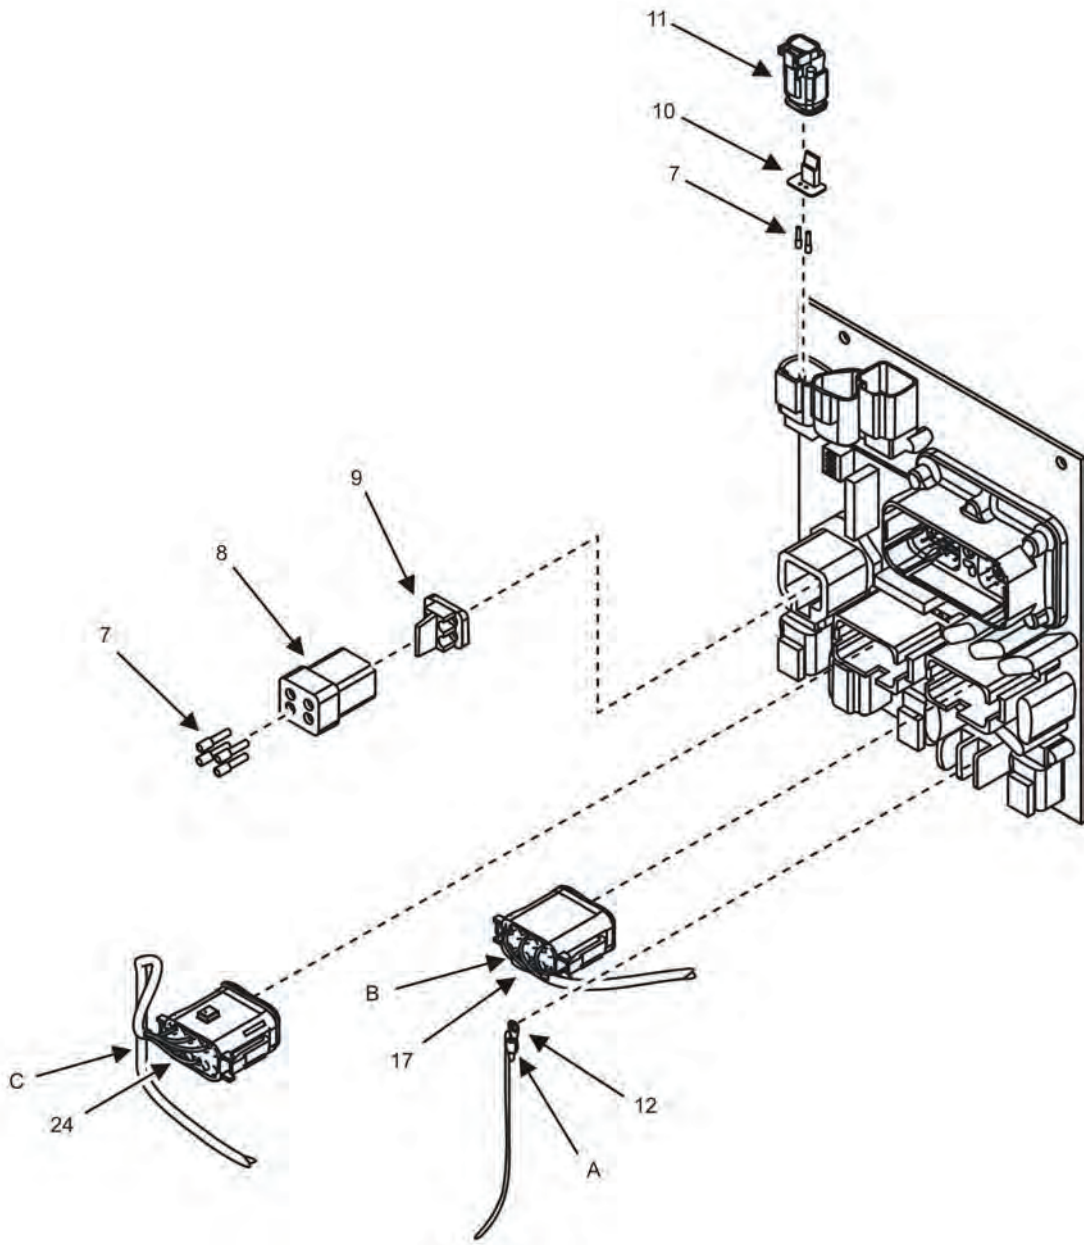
Printed Circuit Board Module (Sheet 2 of 3).
